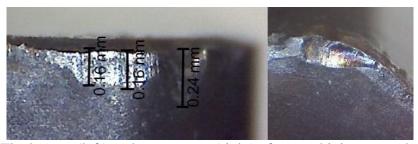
Flank wear (left) and crater wear (right) after machining seventh section (CNGA 120408- S01018A grade 7025).
